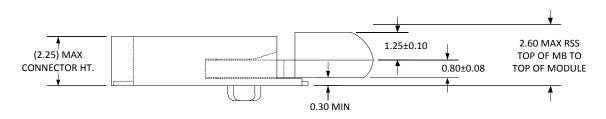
H2.3-S2 - Stack-up Top Mount Single Sided Module for 1.35 Maximum Component Height
